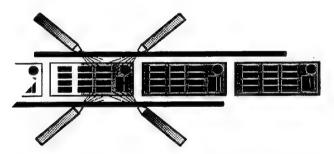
A fixed spray coating system uses fixed spray heads adjusted to cycle on as a board is conveyed past the coating station.
